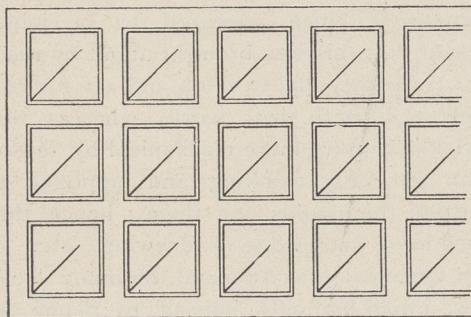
SECTION OF RACK FOR MOLDINGS—END VIEW.
